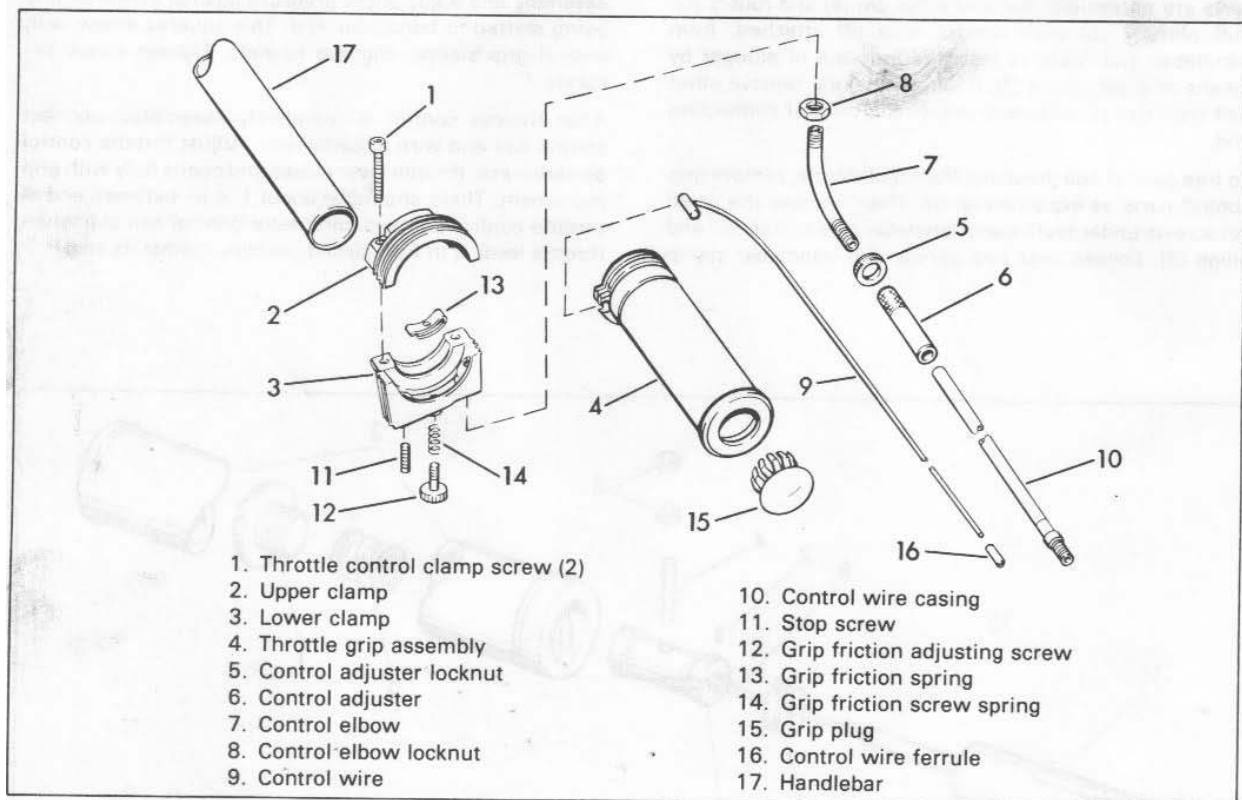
Handlebar Control (Drum Type) - Exploded View
